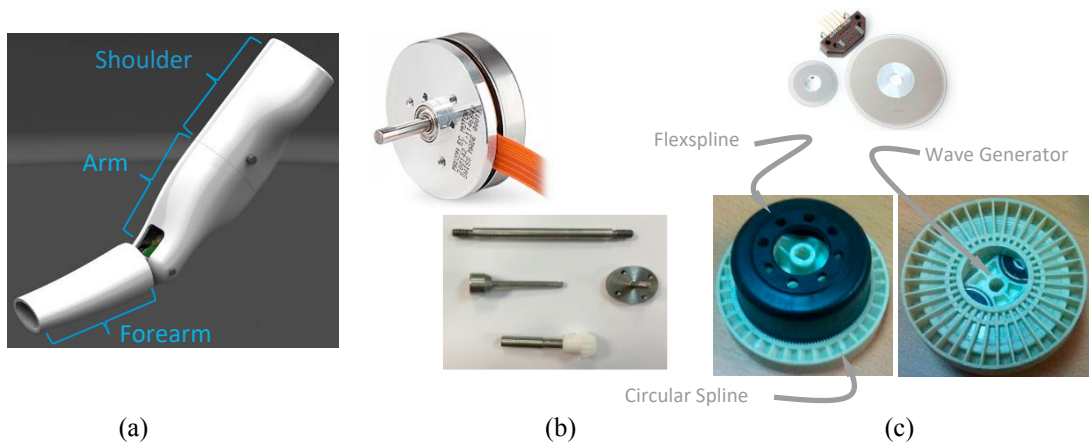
(a) image of the light robot arm; (b) brushless motor, shafts and coupling joints; (c) optical encoder and harmonic drive.
